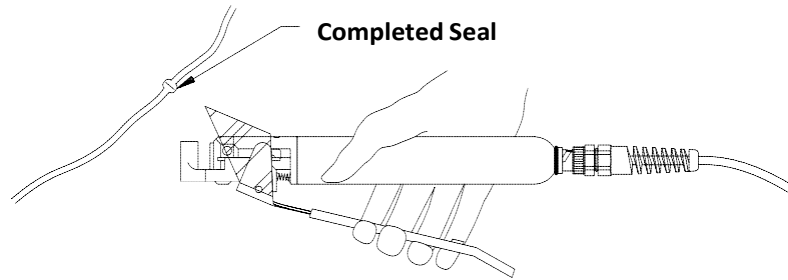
, Releasing the Sealing Head Lever at Seal Completion
